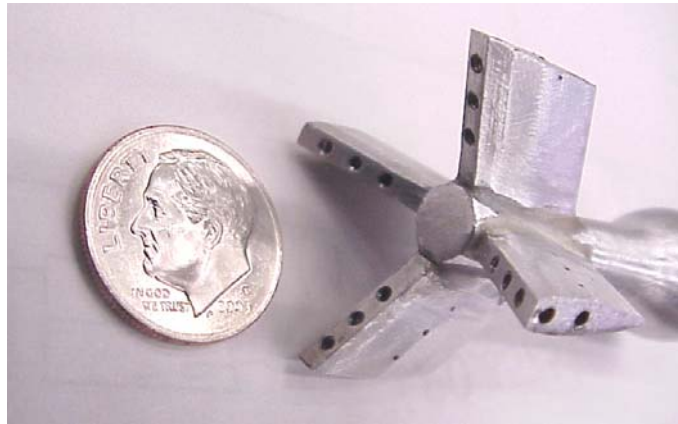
Detailed view of strut assembly with numerous fuel injection holes
